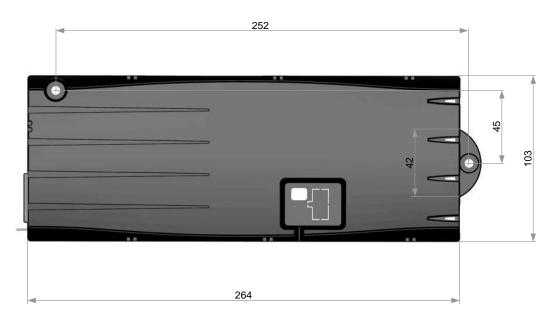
Dimensions in mm; Tolerances according to DIN ISO 2768-1 c
